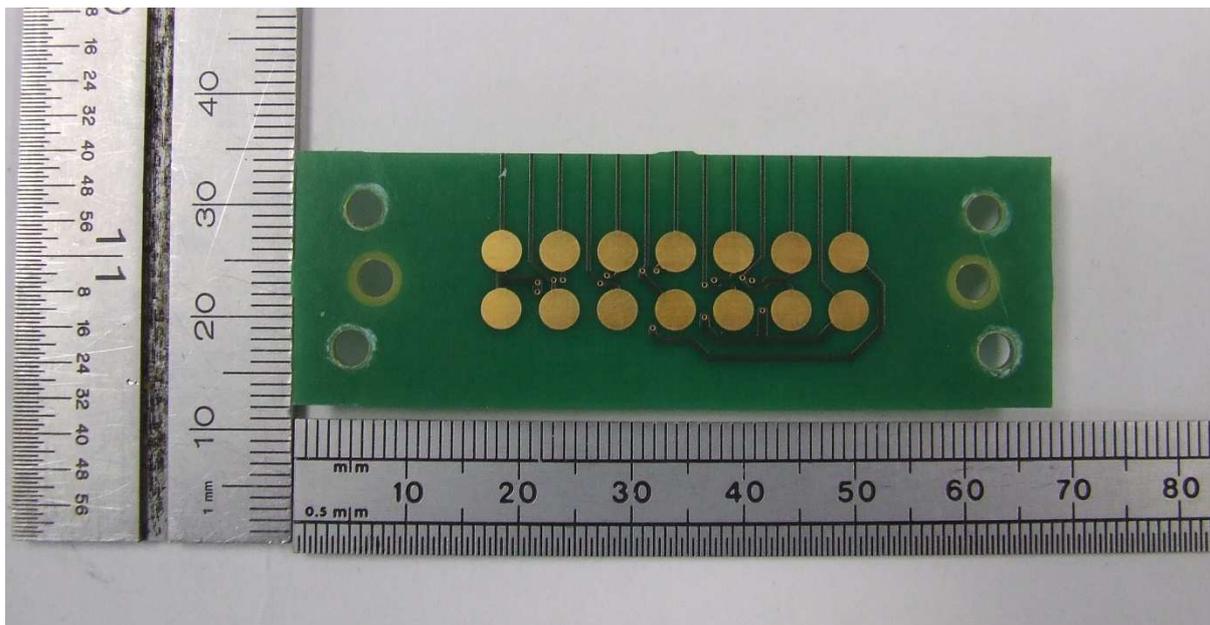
3/4/6ft Array Upper Interconnect PCB
